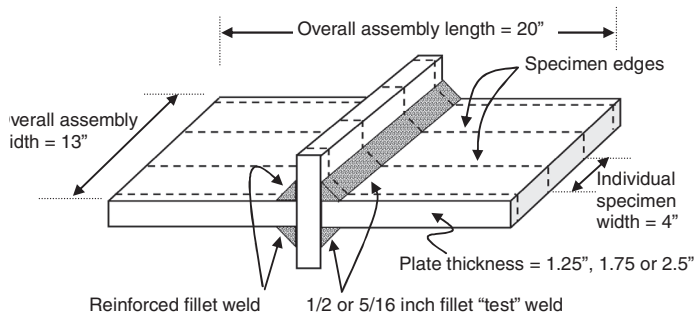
Cruciform specimen assembly showing key dimensions and fabrication details.
